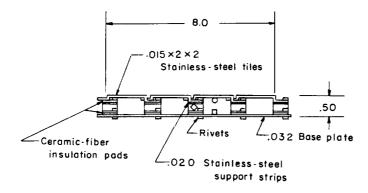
Cross section of stainless-steel-tile heat shield. (Dimensions in inches.)
